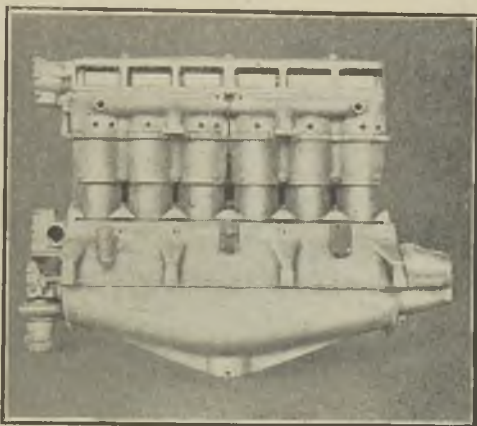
ALUMINIUM CASTINGS FOR THE
